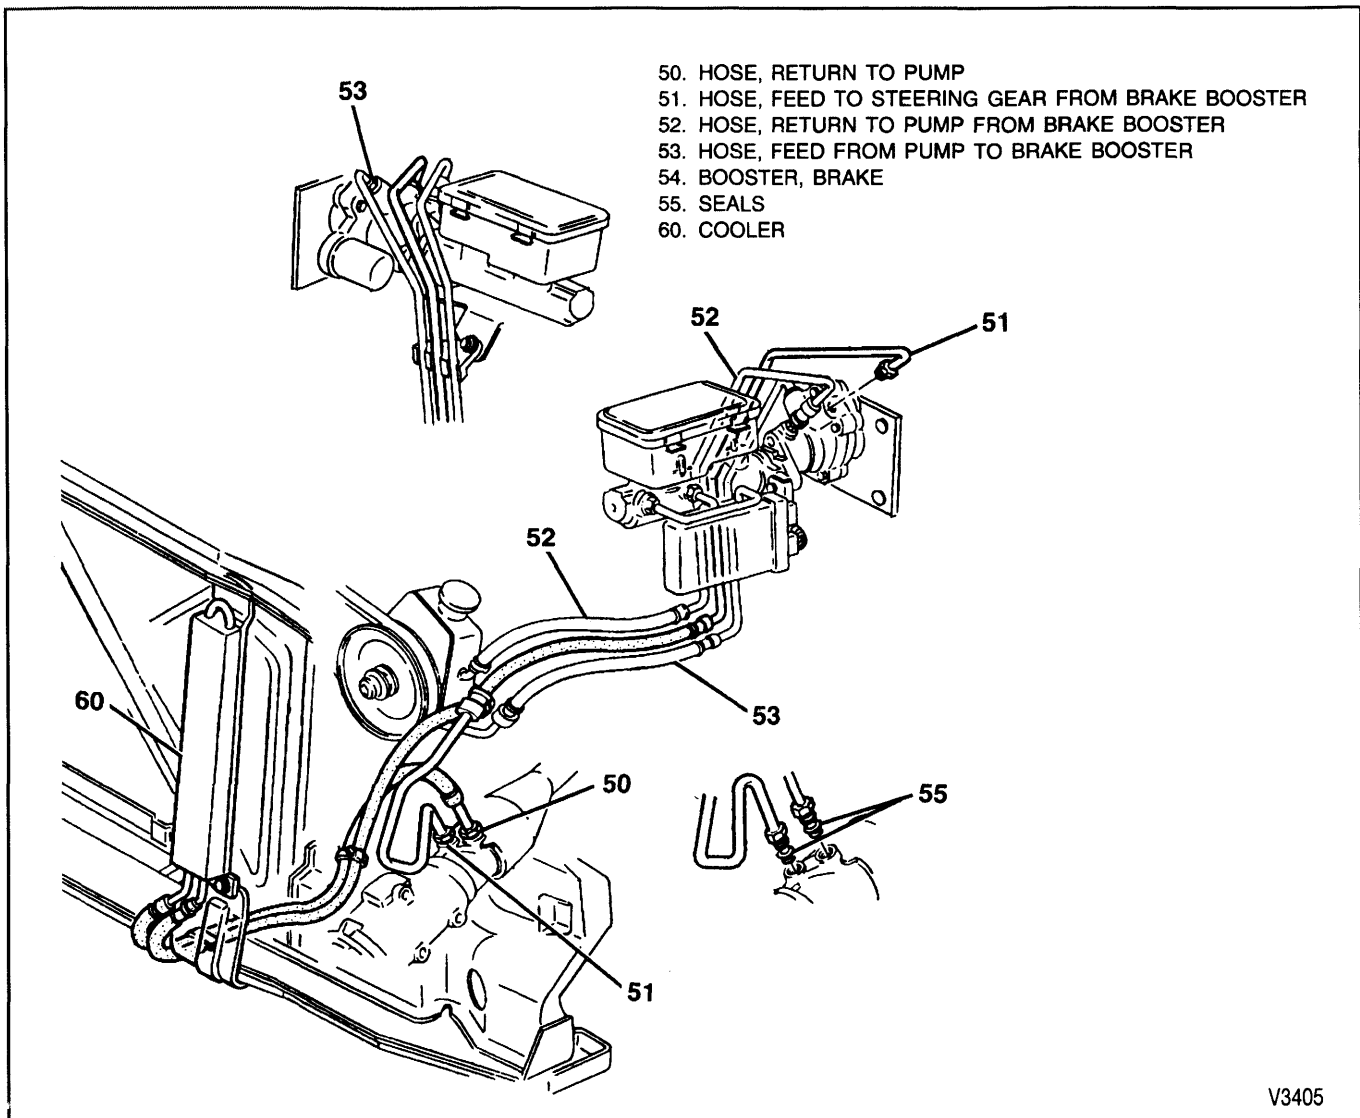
Hose Routing (C3HD I-Beam Front Axle)
